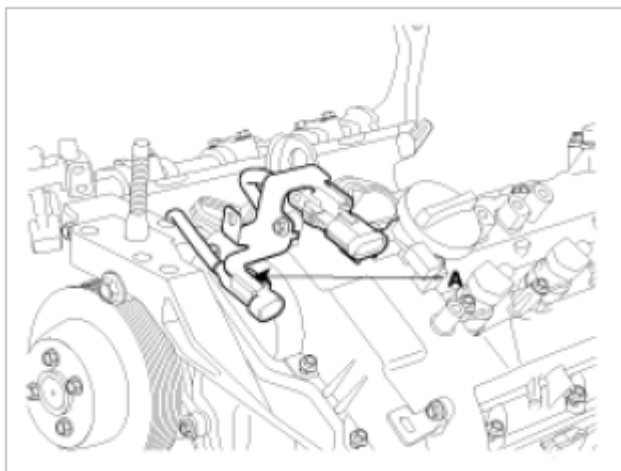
Identifying Surge Tank With Mounting Screw (3.8L)
